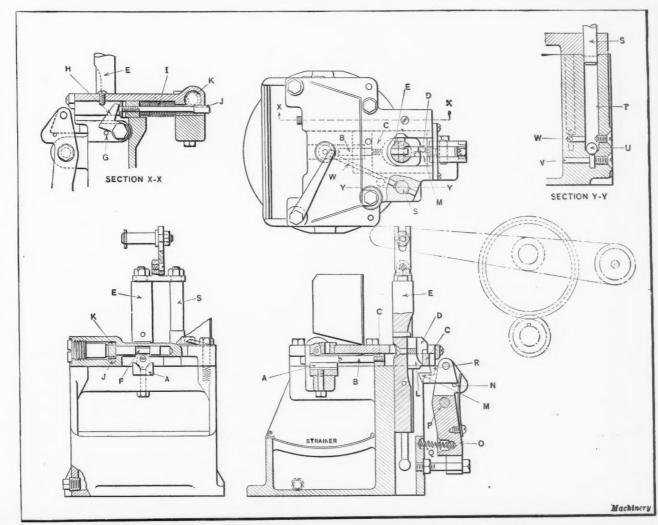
Details of Design of Mechanism of the Automatic Pin Drilling Jigs shown on Machine in Fig. 1
